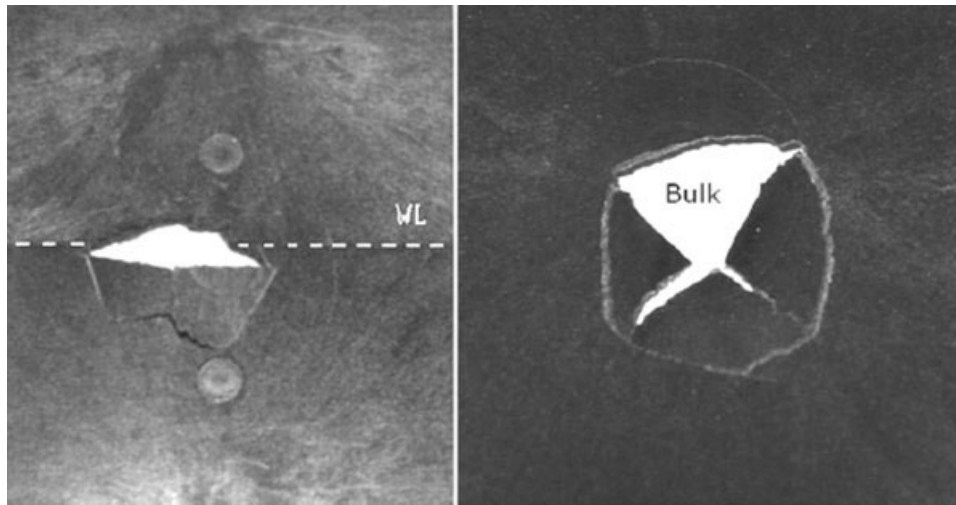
Falling weight impact tests, fracture pattern at weld line, and bulk zones.
